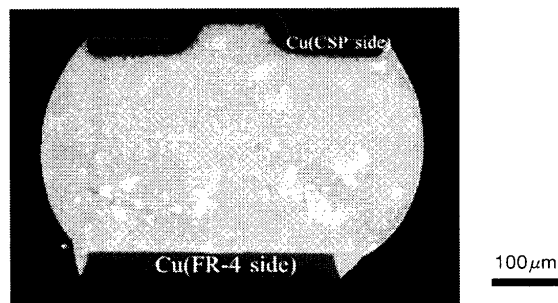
Cross sectional view of CSP solder joint (Sn-37Pb)
